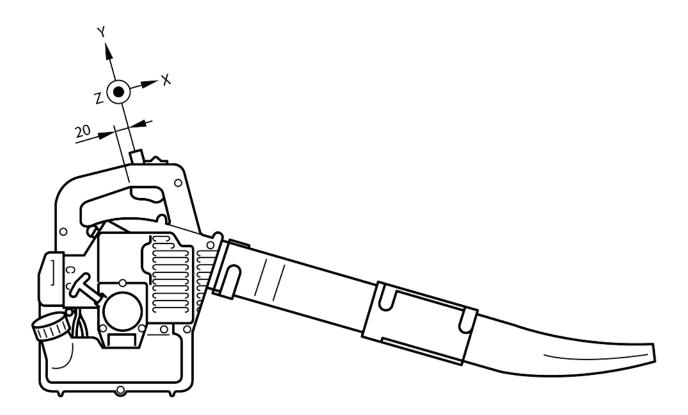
Accelerometer mounting position for handheld blower/vacuum
